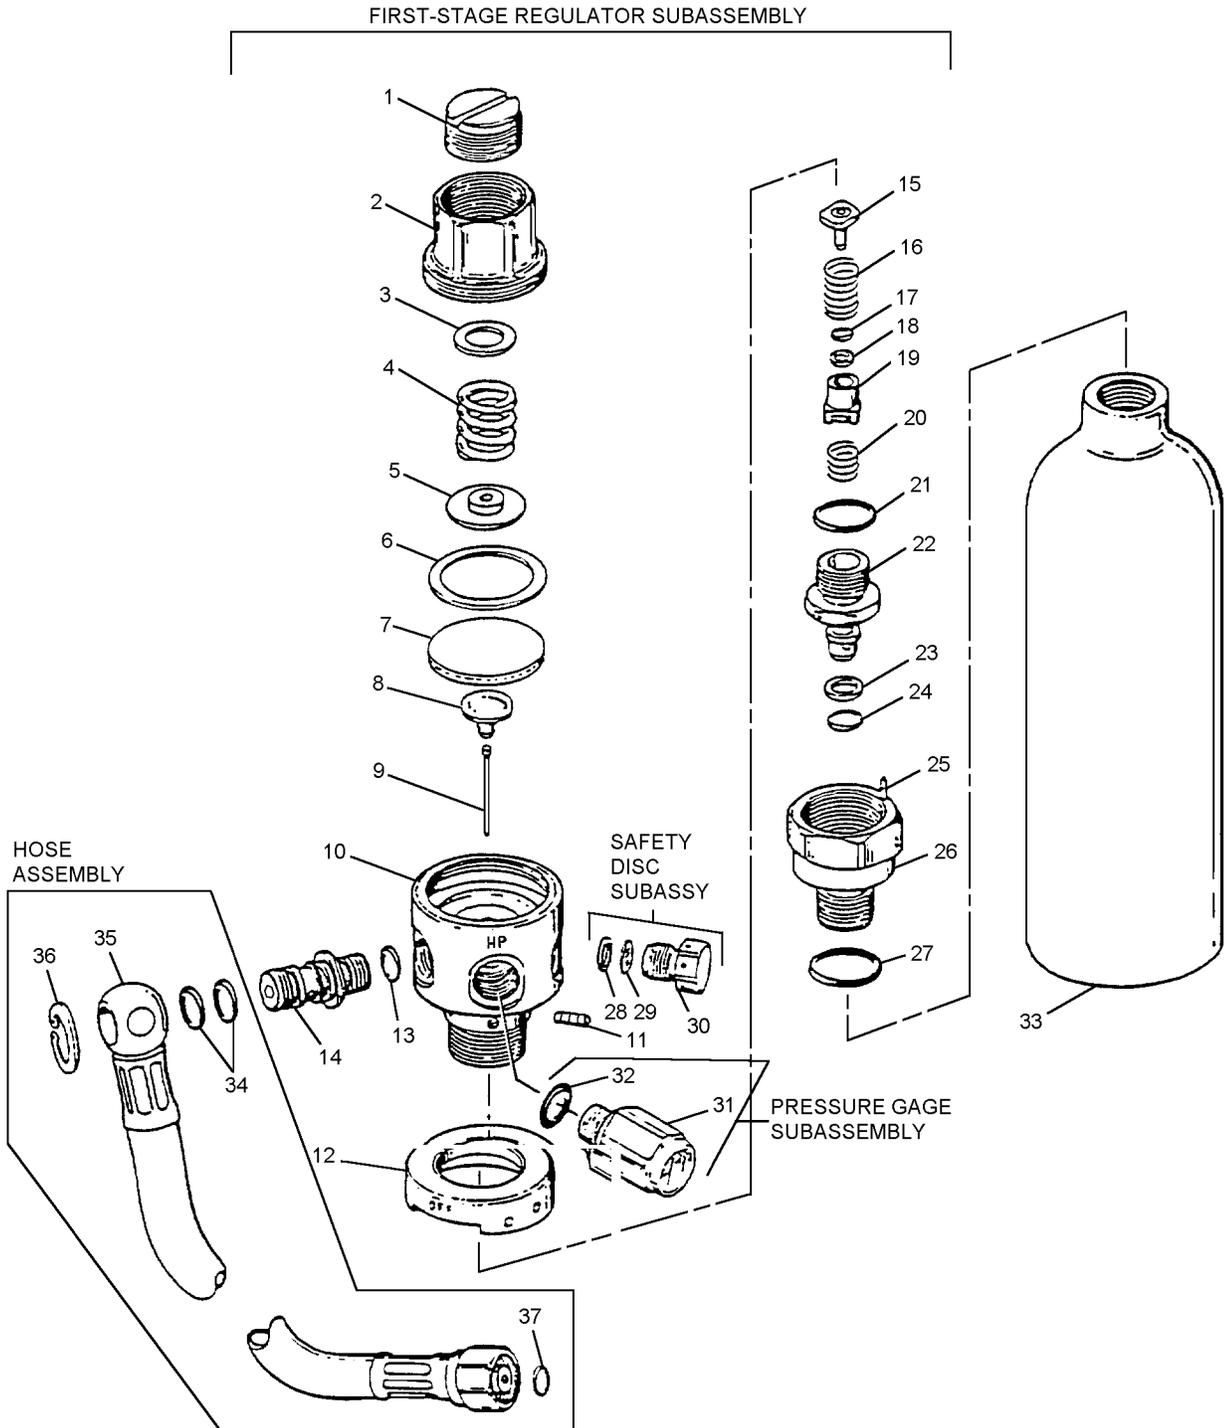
First-Stage Regulator Assembly and Hose Assembly (Sheet 1 of 2)
